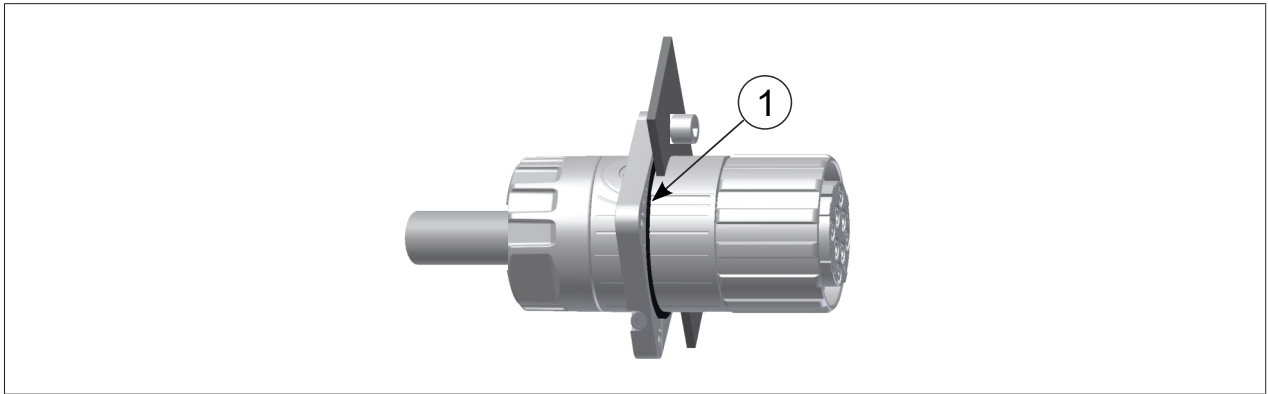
Attaching the metal flange to the connector (rear panel installation)
